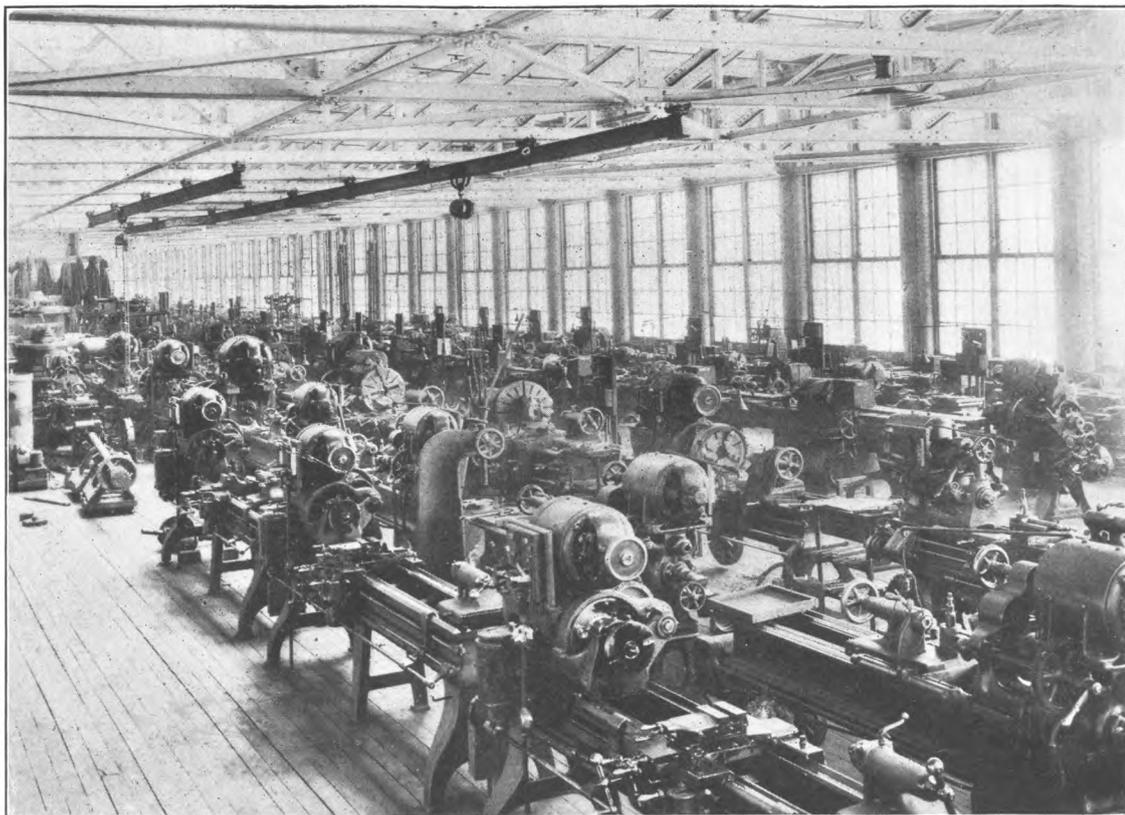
LATHES DRIVEN BY INDIVIDUAL MOTORS.
